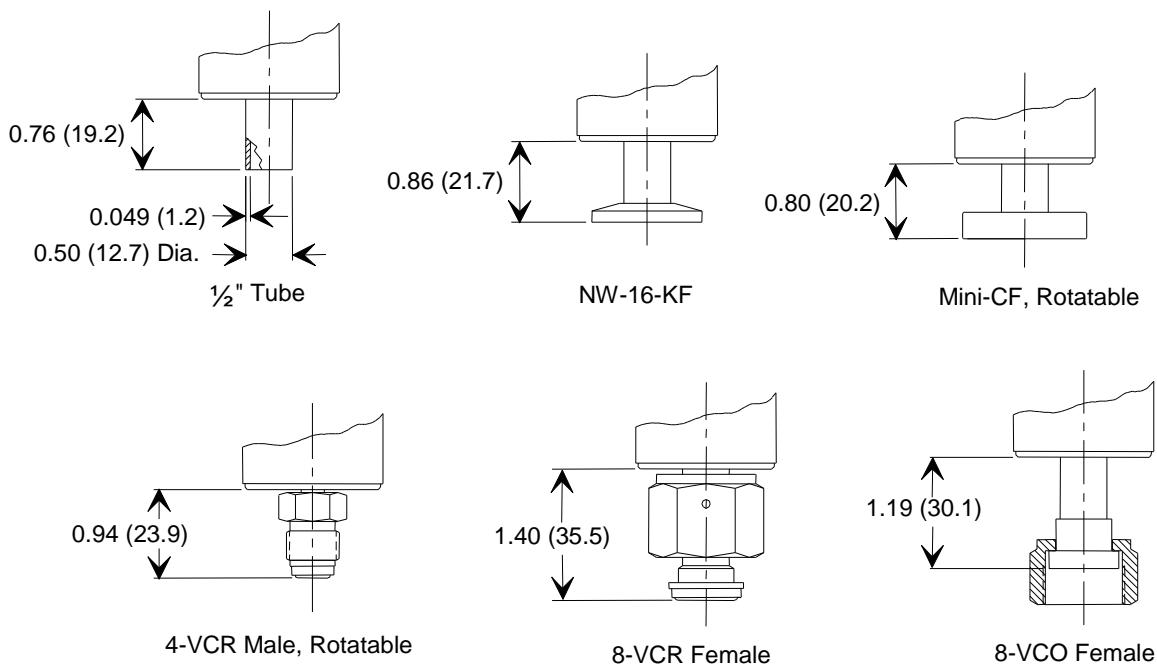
Fitting Dimensions for the Low Pressure Type 722C Transducer
